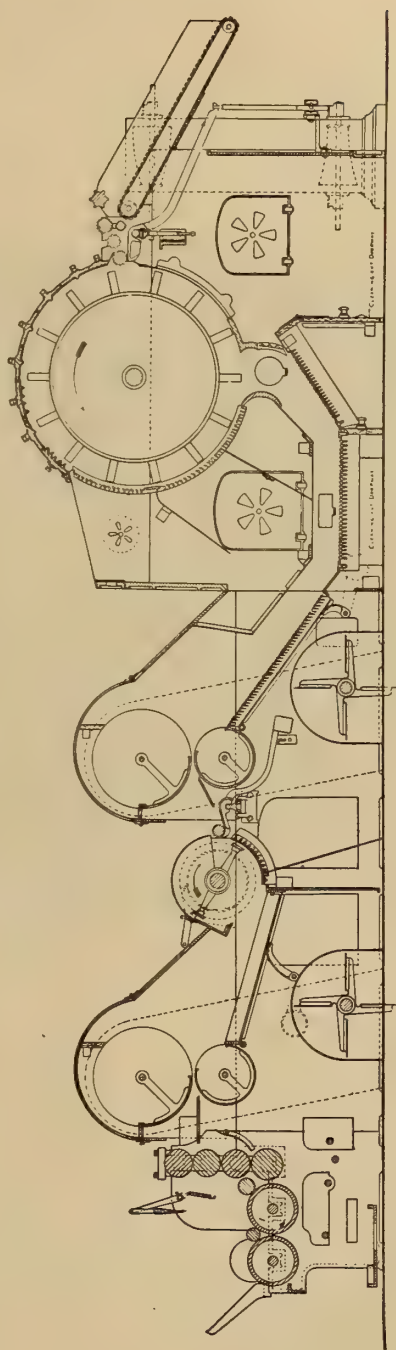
SECTIONAL VIEW OF A BUCKLEY OPENER AND LAP MACHINE. HOWARD & BULLOUGH, LTD.
